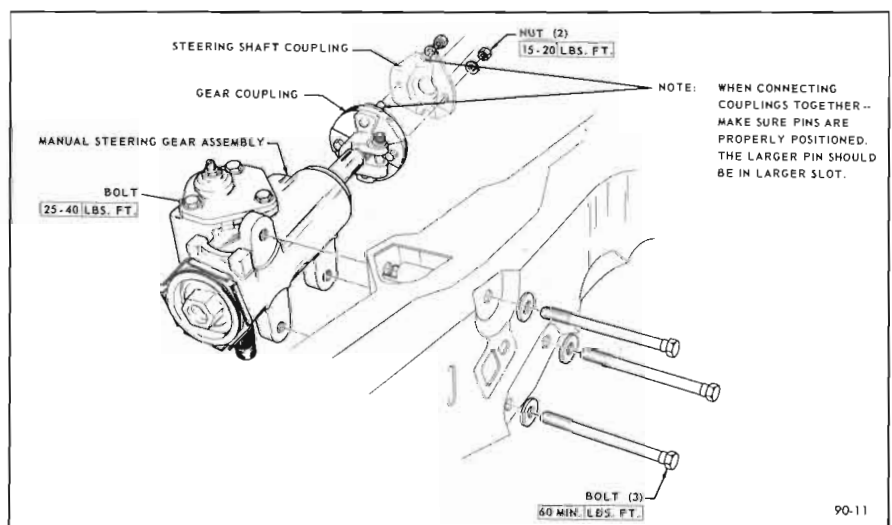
Manual Steering Gear Installation (43-44-45-46000 Series)
